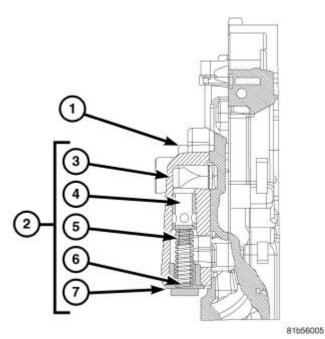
Oil Pressure Relief Valve Components Courtesy of CHRYSLER LLC
